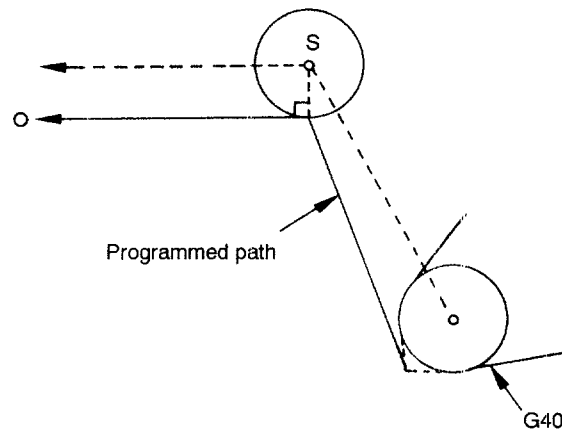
Offset Start-up (Straight-line to Straight-line (1))
